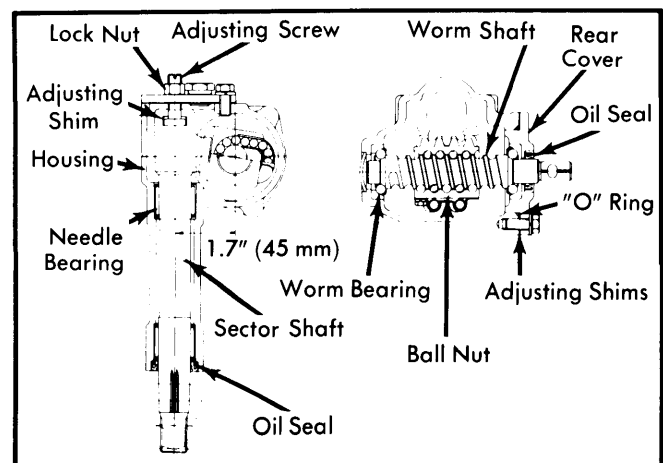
Sectional View of Datsun Recirculating Ball Steering Gear
